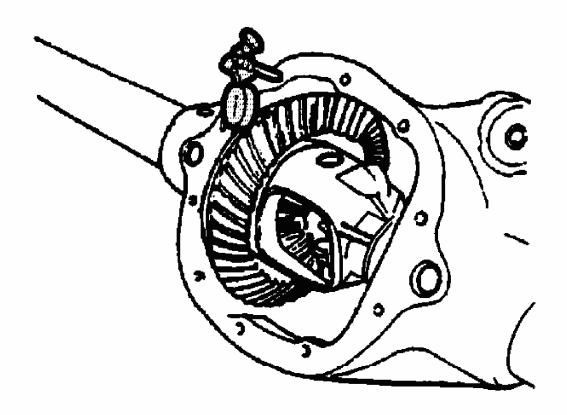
Measuring Ring Gear Backlash Courtesy of GENERAL MOTORS CORP.
